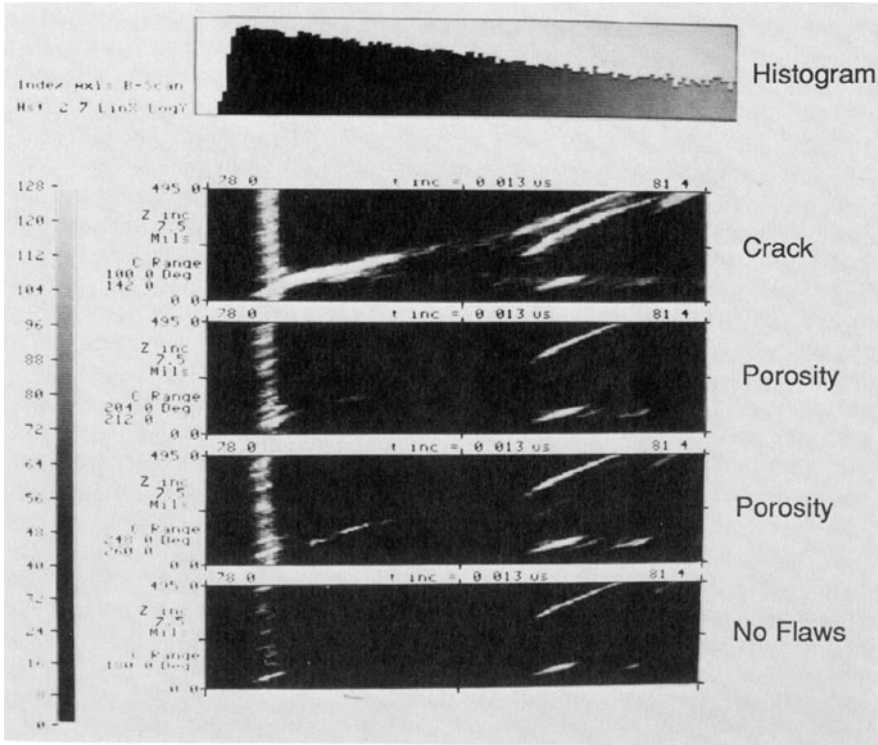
Shear Axial B-Scans Showing Crack and Porosity.
